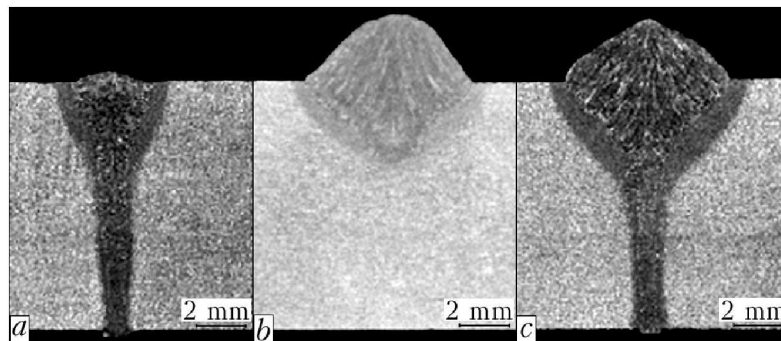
Welds: laser welding (a), GMAW (b), laser-arc hybrid welding (c) [189]
